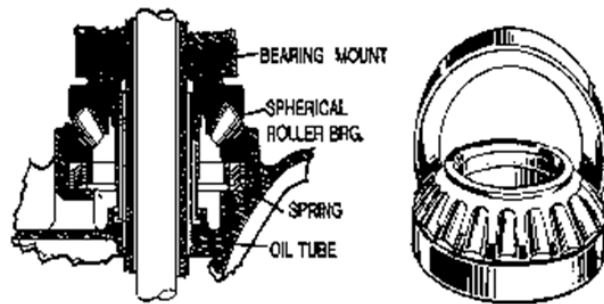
Spherical Roller Thrust Bearing (US motors)
